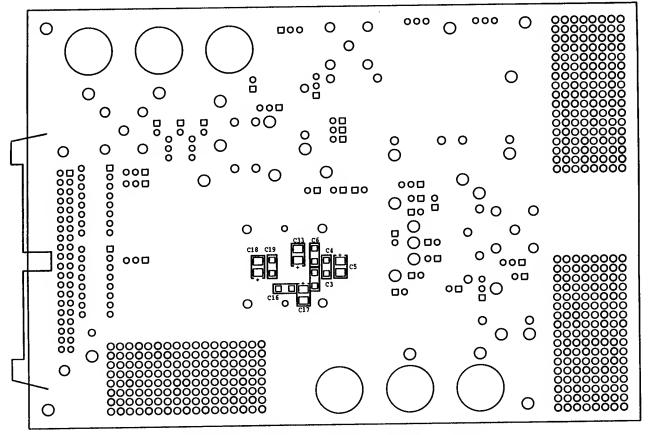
Evaluation Board Solder Silk (Not to Scale)
